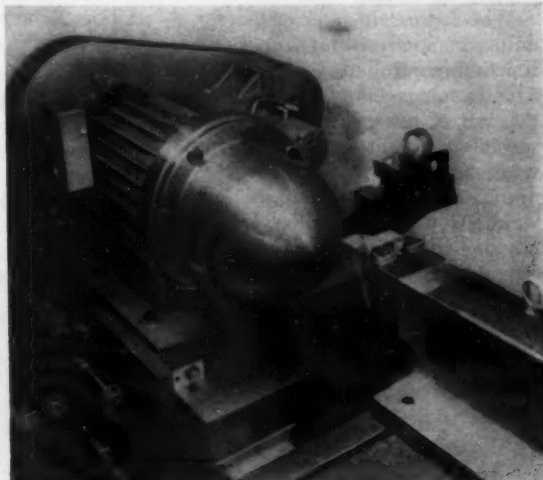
Custom Ex-Cell-O turning and boring spindle with work-piece
